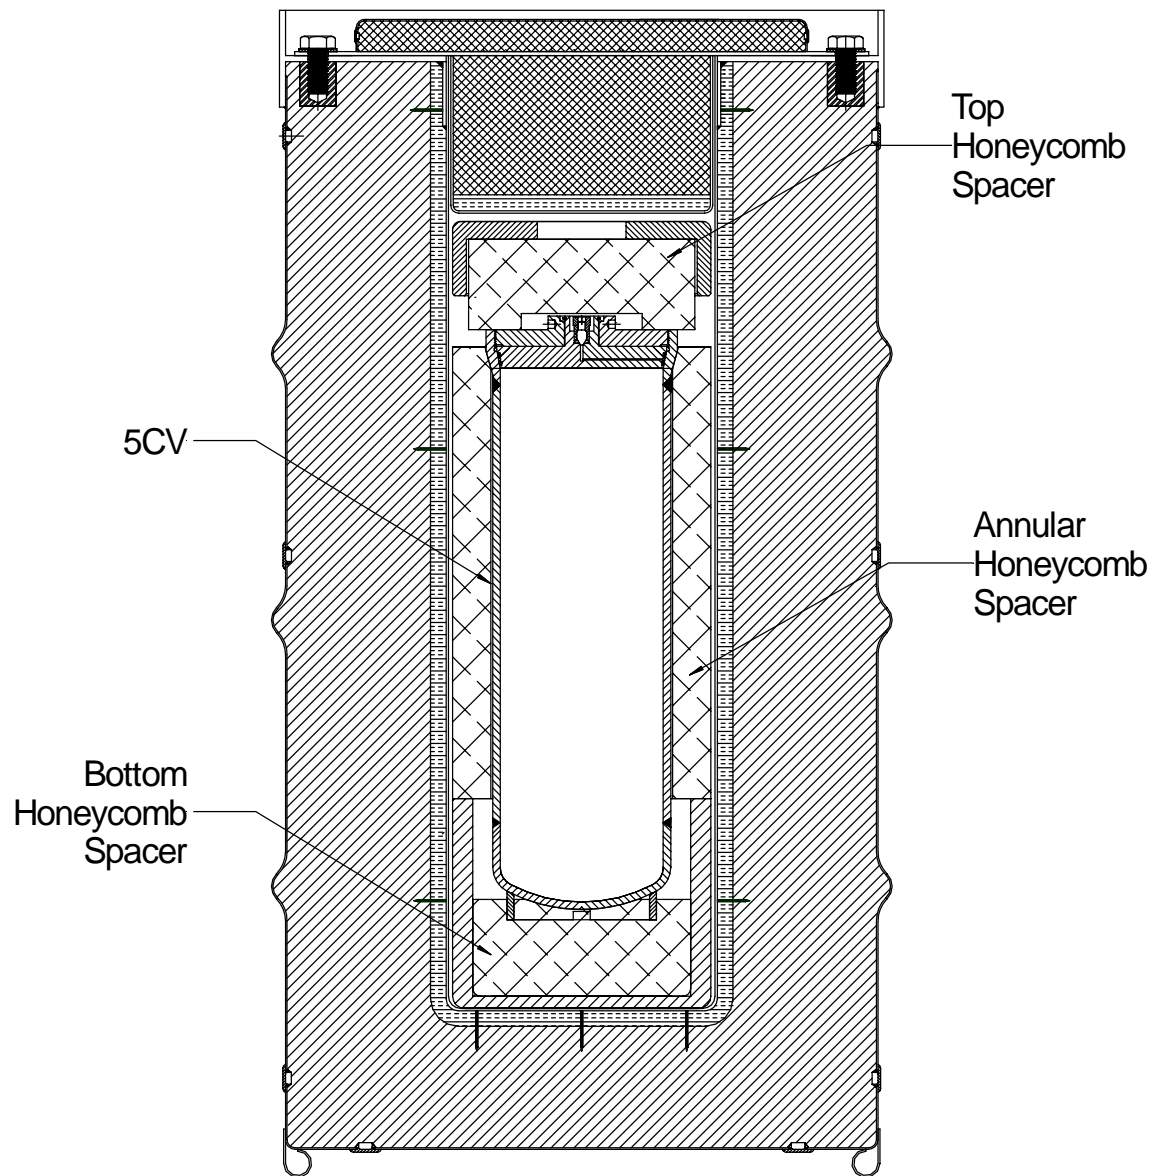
Assembly Cross-Section of 9977 Packaging with 5CV
